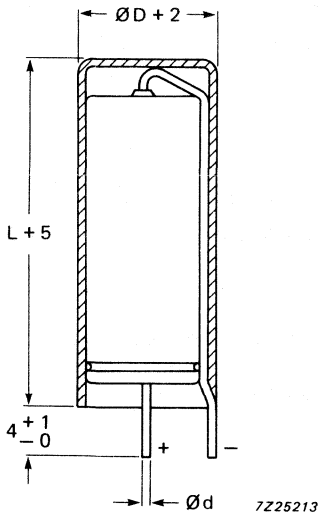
Component outline, style 4; for dimensions ϕd , ϕD and L , see Table 3. Available to special order.
